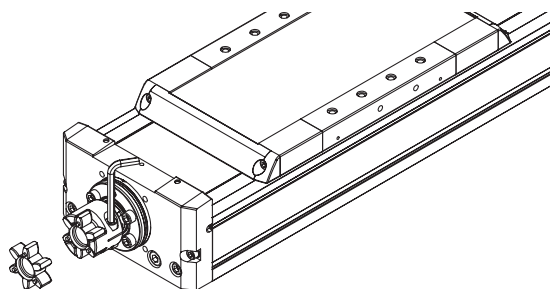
Tightening the clamping hub and depressing the elastomer insert (HT150S, HT200S)
